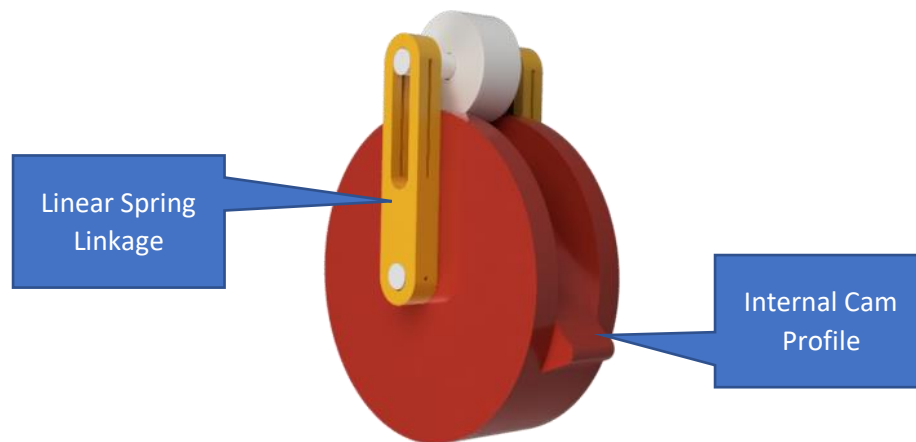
Conceptual CAD of the non-linear spring driven check valve.
